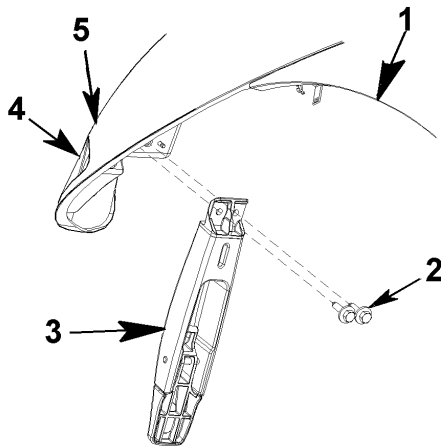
Upper Hood/ Fender Latch Attachment —Passenger Side Shown
